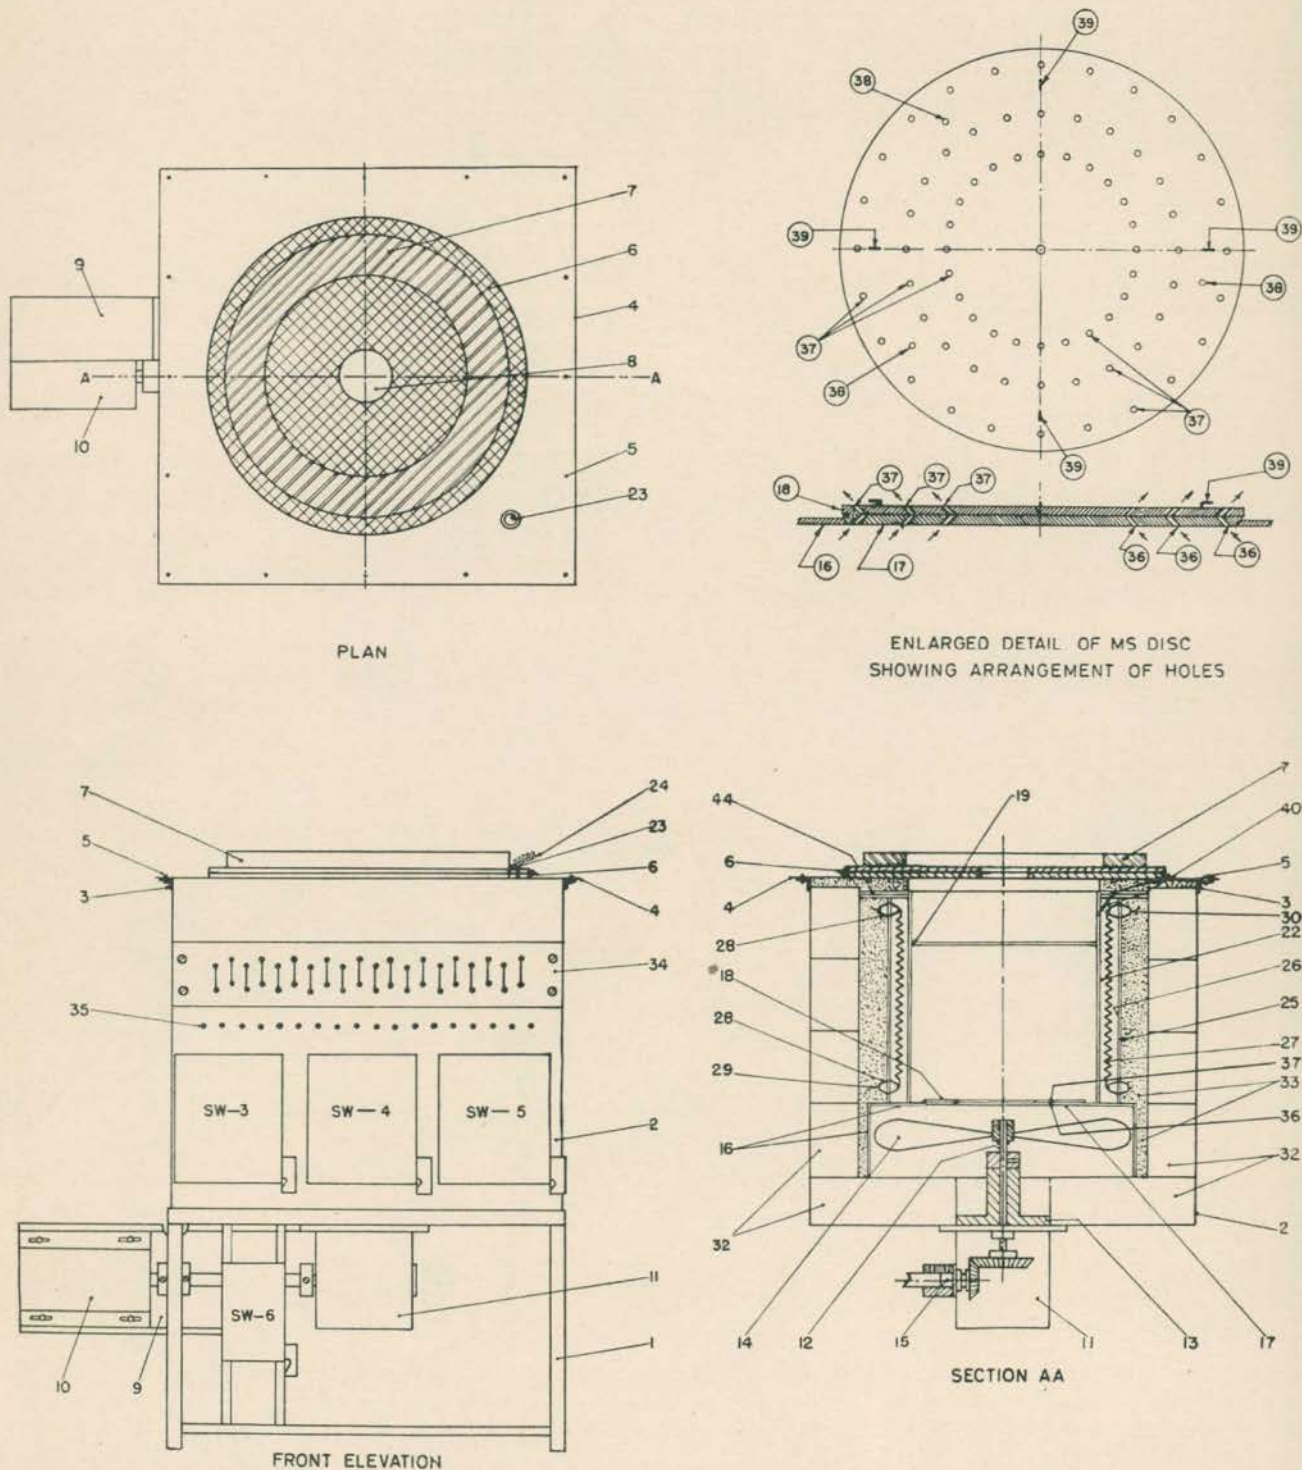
Assembly and Details of Furnace (For Description of Parts, see Table I)
